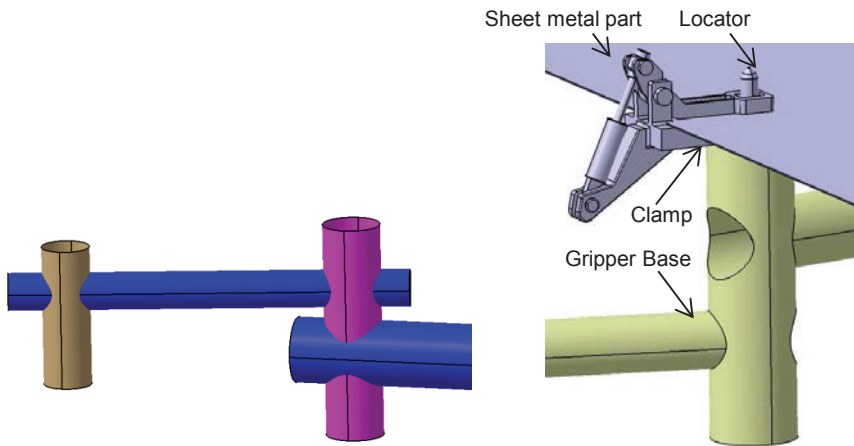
Left: Mechanical locking; right: Standard clamp and locator on the gripper base (adjustment boxes not represented)
